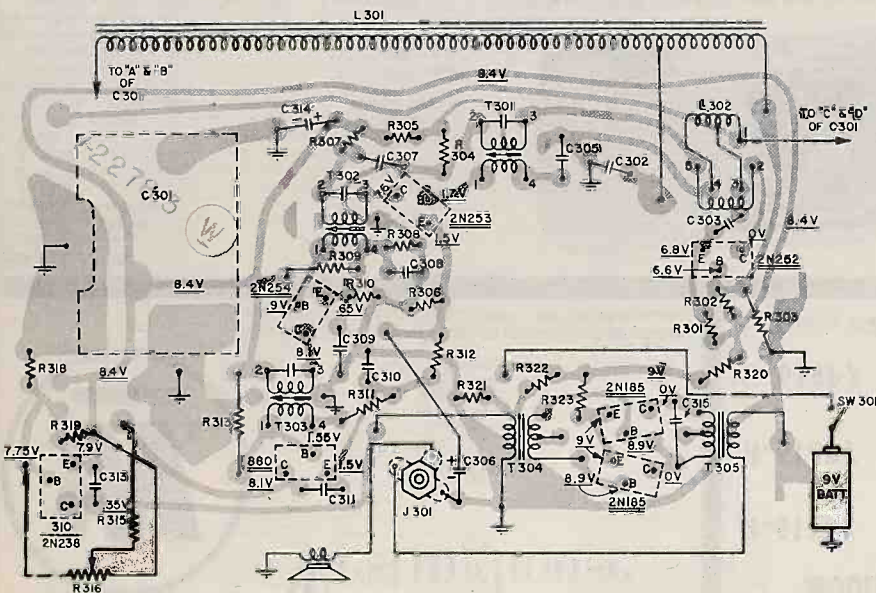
BOTTOM VIEW OF PRINTED BOARD SHOWING TOP COMPONENTS SYMBOLICALLY
